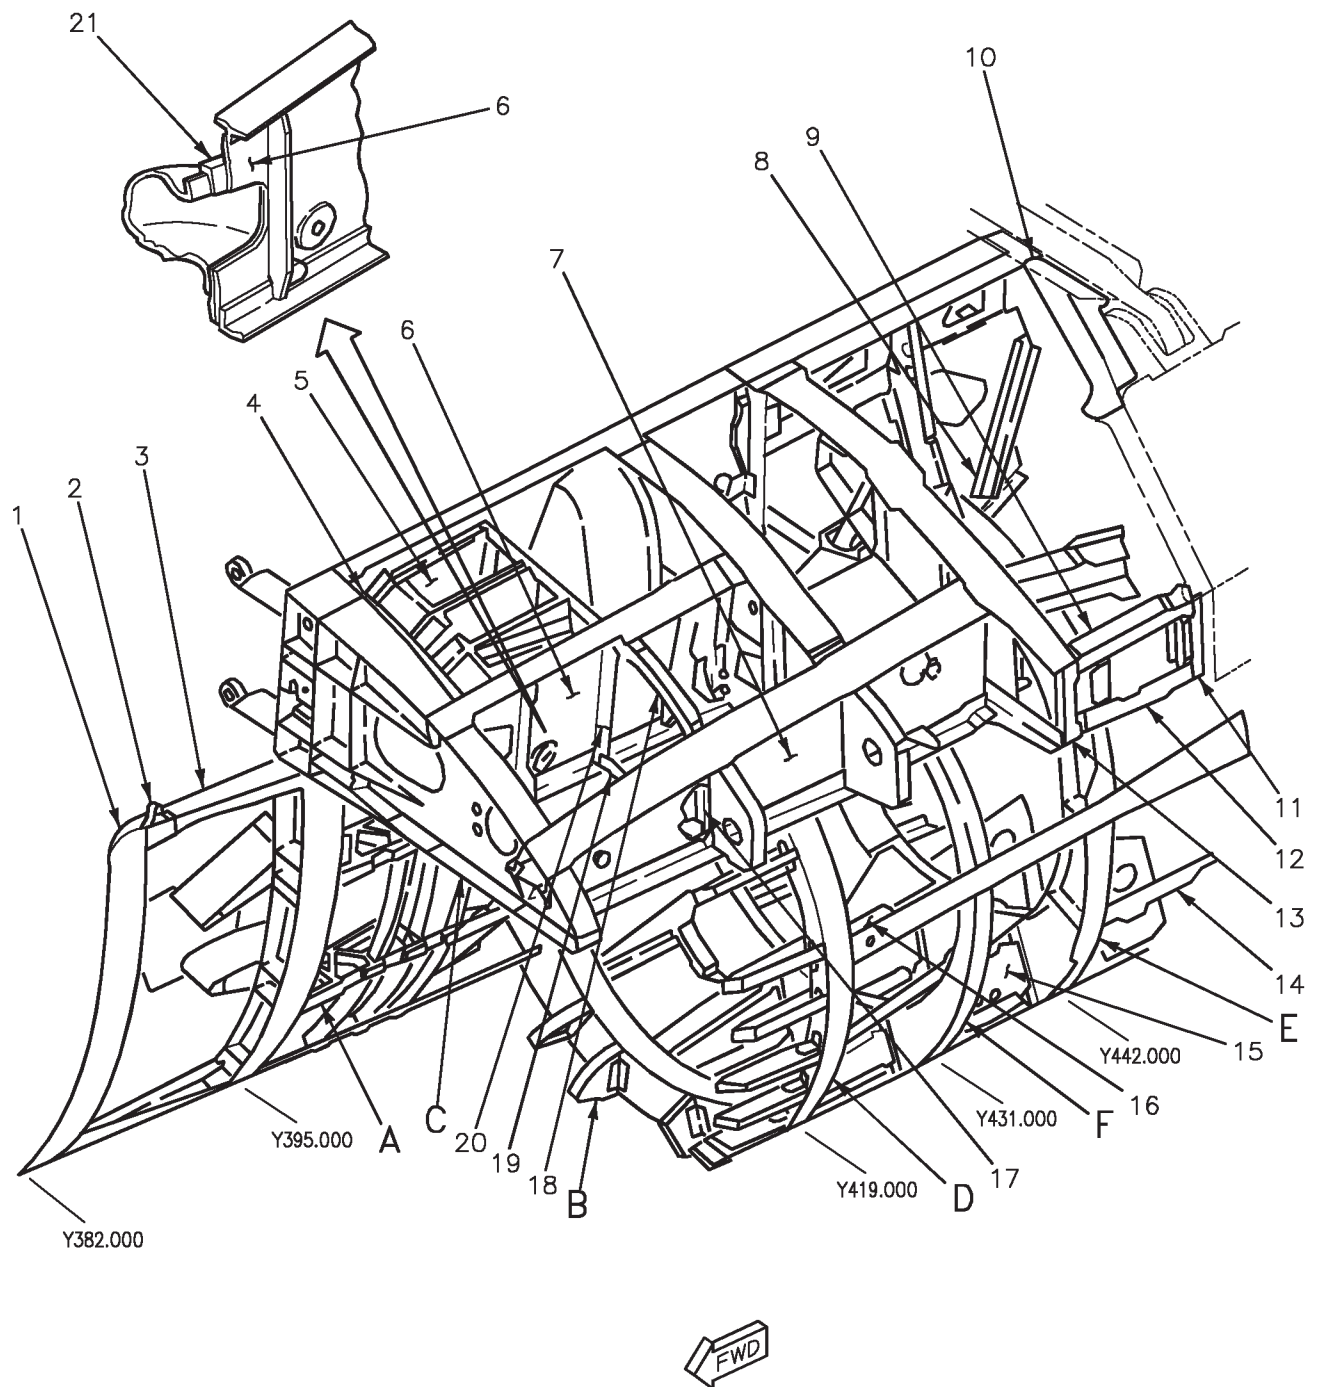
Air Inlet Bulkheads, Formers, Longerons and Stringers (Sheet 1)
